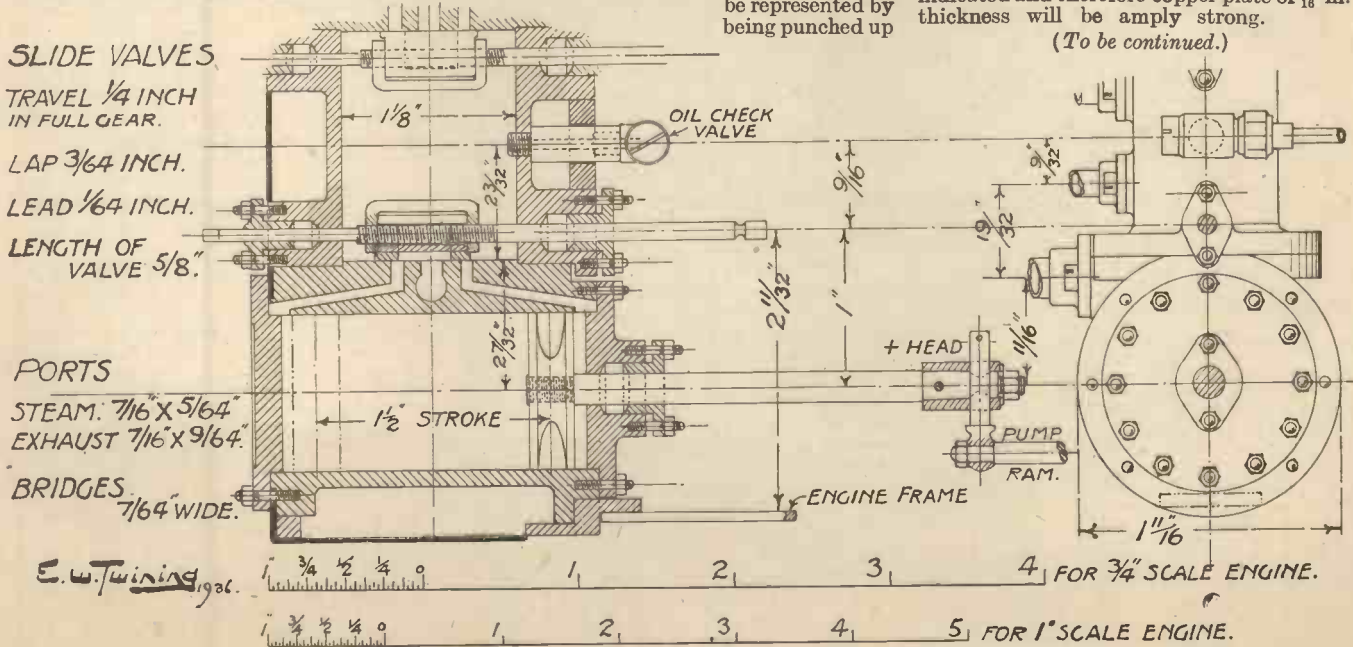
One of the cylinders in sectional plan and back elevation.
